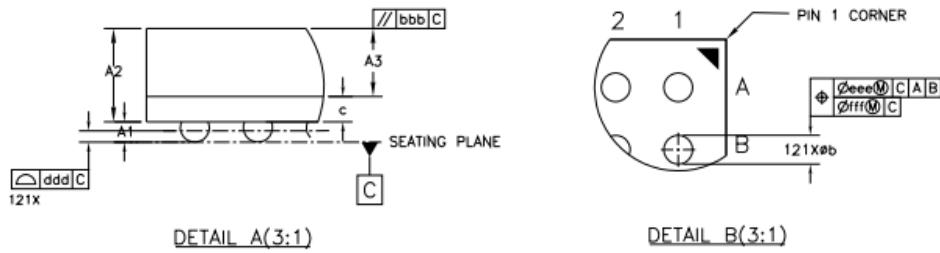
RKNanoD-GLFBGA121 Package eDETAIL A & B
